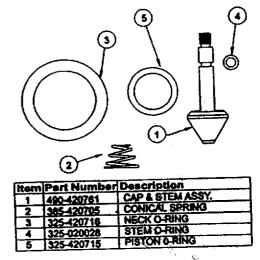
Wet Valve Seal Rebuilding Kit (P/N 490-420698).
